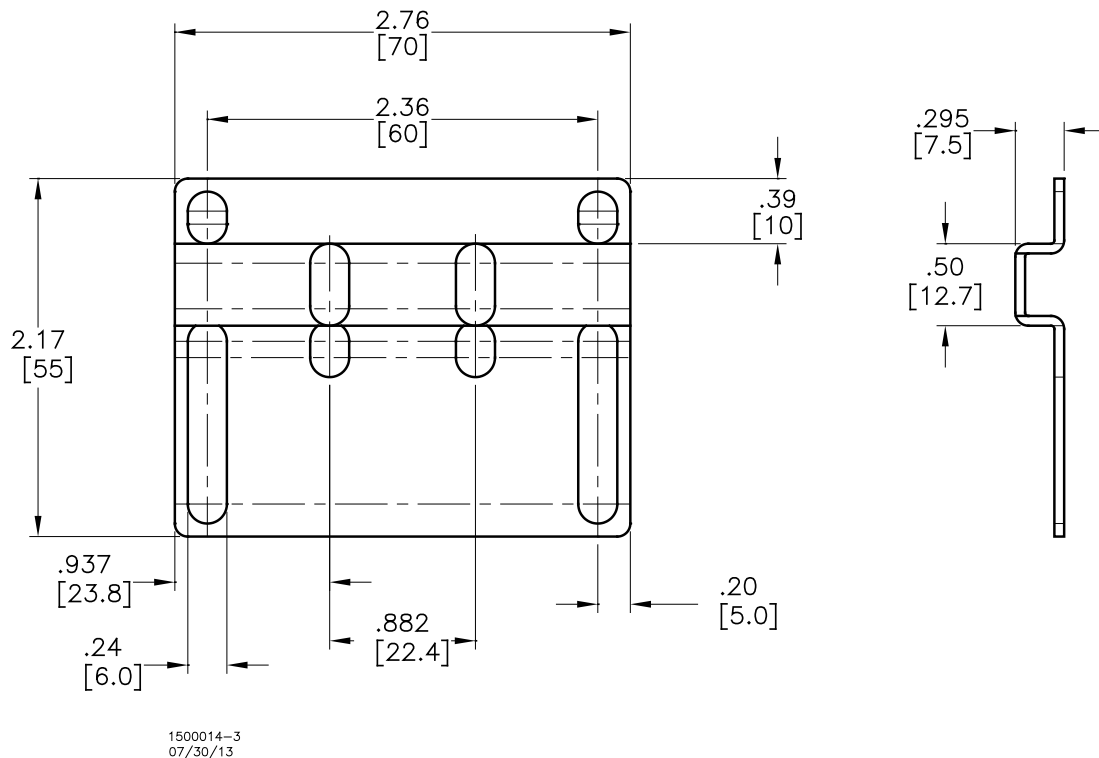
Panel mount plate. Dimensions are in inches [millimeters].
